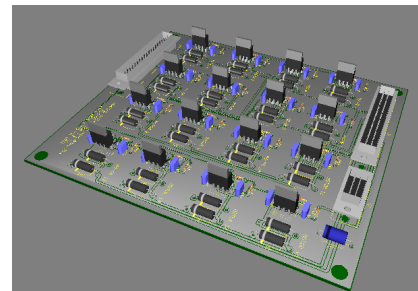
The figure above shows a 3D model of the PCB containing the high power components.
